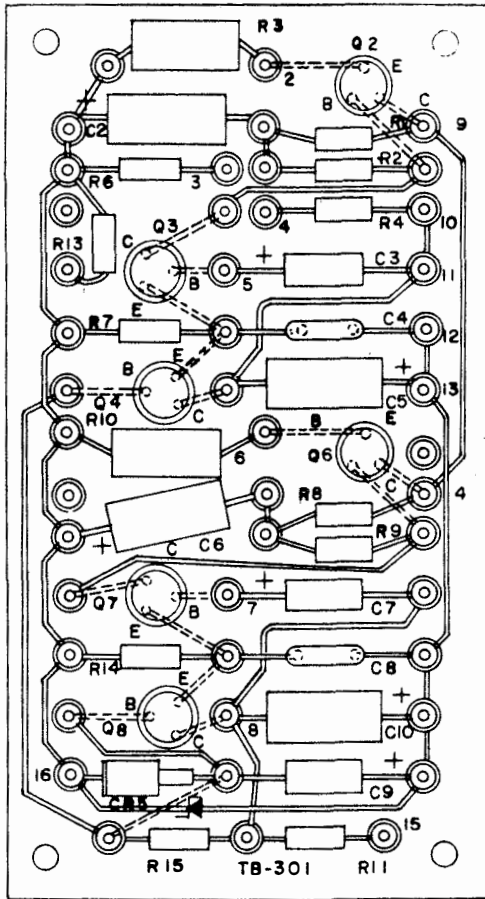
Terminal Board Low Voltage Assembly Wired TB-301
